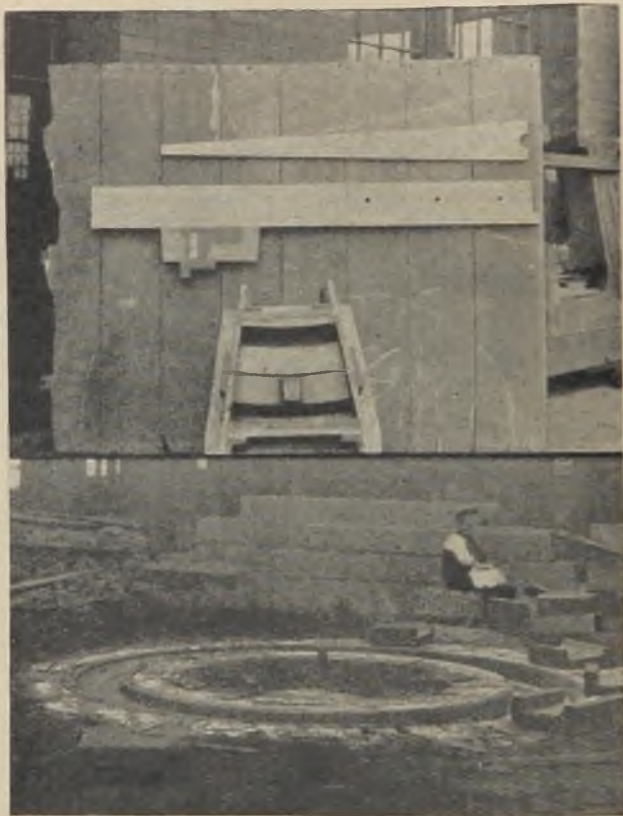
SHOWS PATTERN-MAKING REQUIRED TO PRODUCE A LARGE RING.
